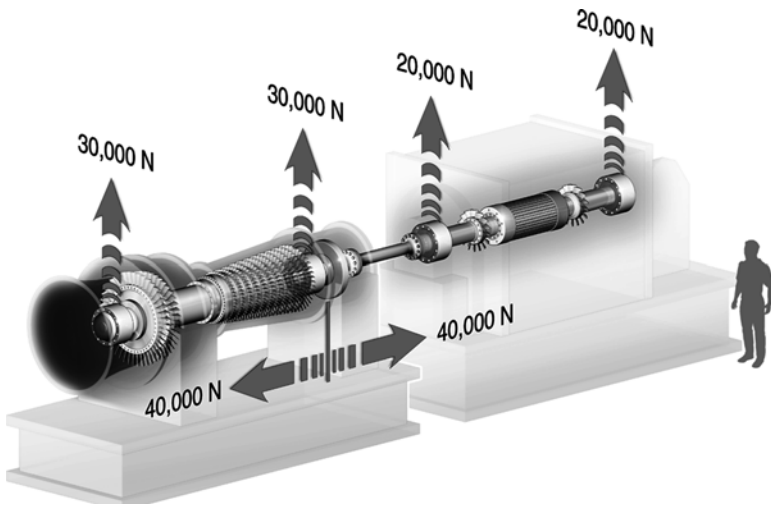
Gas-turbine/Generator for power generation: four radial bearings and one thrust bearing, 6,010 rpm, 9,000 kW, bearing diameter 400 mm (courtesy S2M)
